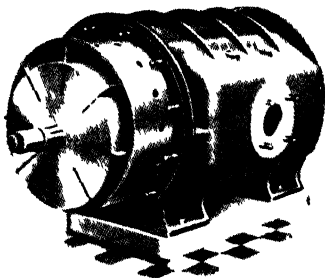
PARTLY ASSEMBLED EXHAUSTER
